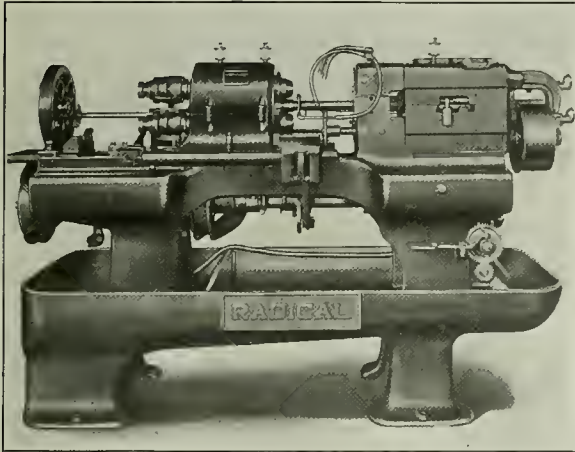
Radical 4-Spindle Automatic Turret Lathe
